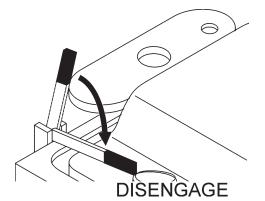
Transmission Engage/Disengage Lever (Disengage Position)
